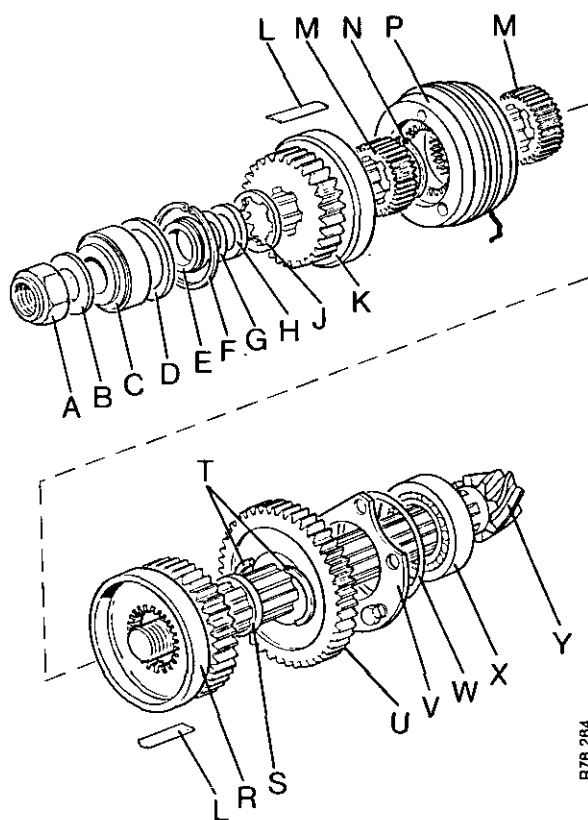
BEVEL PINION SHAFT ASSEMBLY
